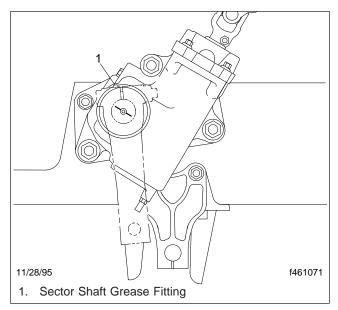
, TRW TAS Series Sector Shaft Lubrication
